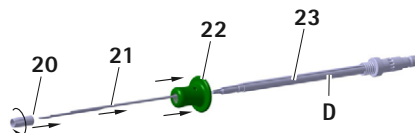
Mounting the S<sup>4</sup>C screwdriver
